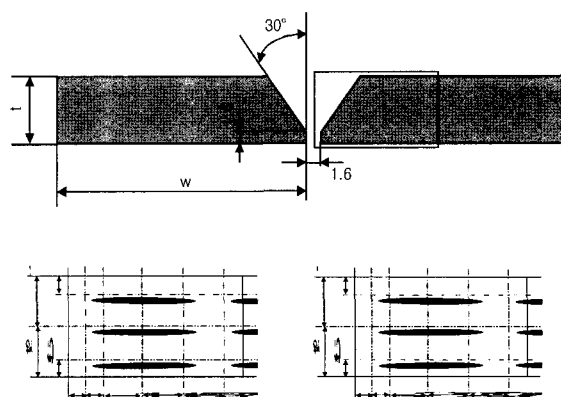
Schematic diagram of multipass weld pipe
